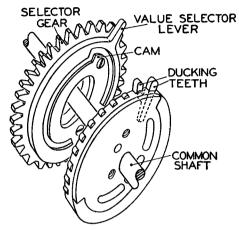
" Ducking" Tooth Selector Mechanism.
